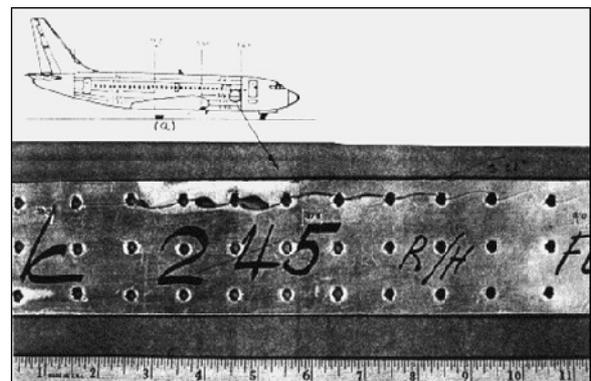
Multi-site damage (MSD) at a B-737 fuselage lap joint [1].
